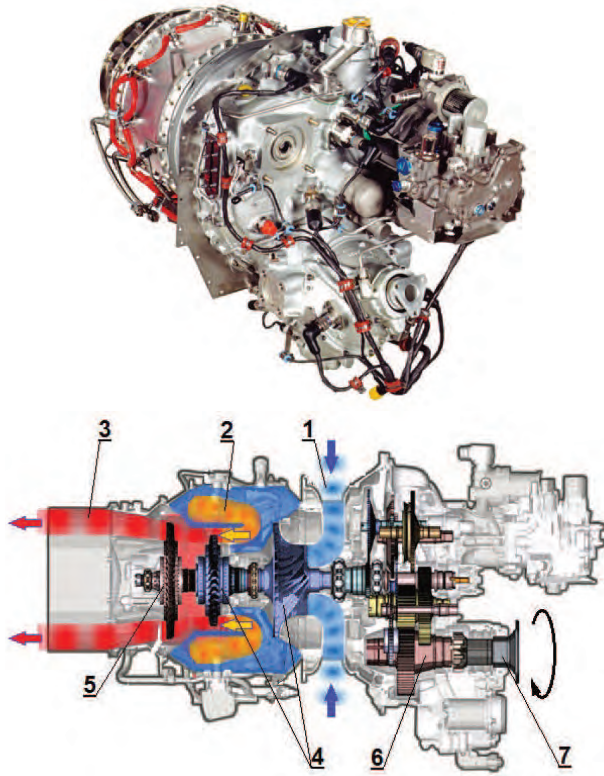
View and cross-section of the PW 206 turboshaft engine: 1 – air inlet, 2 – combustor chamber, 2 – compressor, 3 – exhaust, 4 – radial compressor and turbine, 6 – reduction gearbox, 7 – shaft [17]
